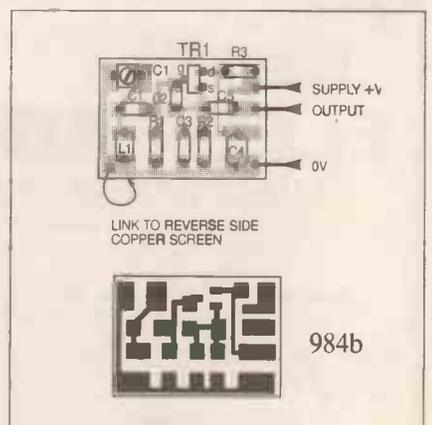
Printed circuit board component layout and copper foil master pattern.
